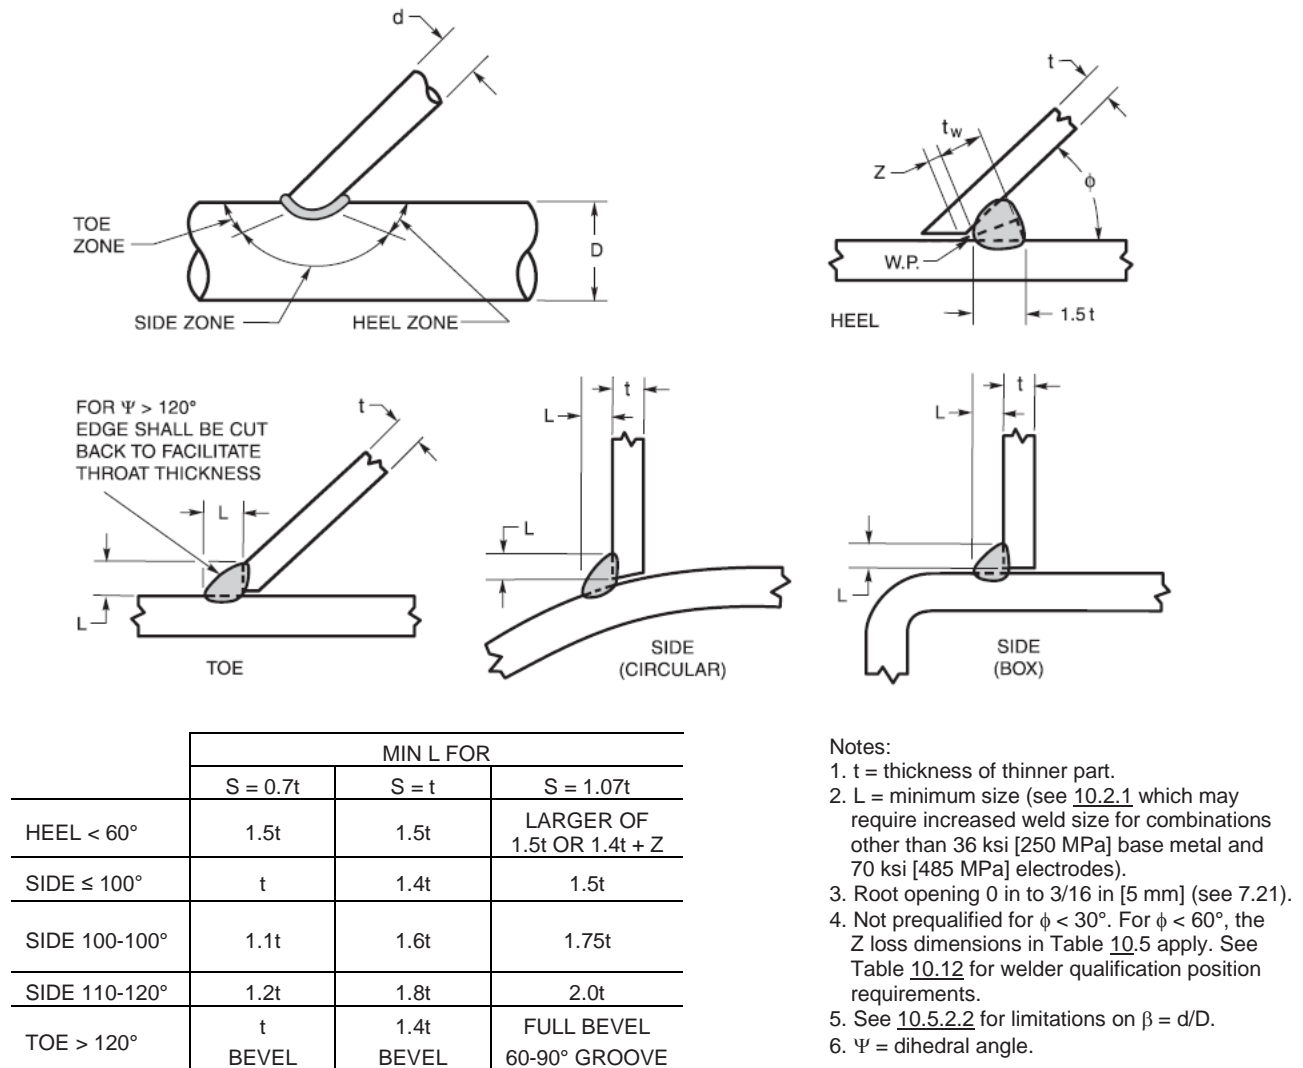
Fillet Welded Prequalified Tubular Joints Made by SMAW, GMAW, and FCAW (see 10.8.1)
